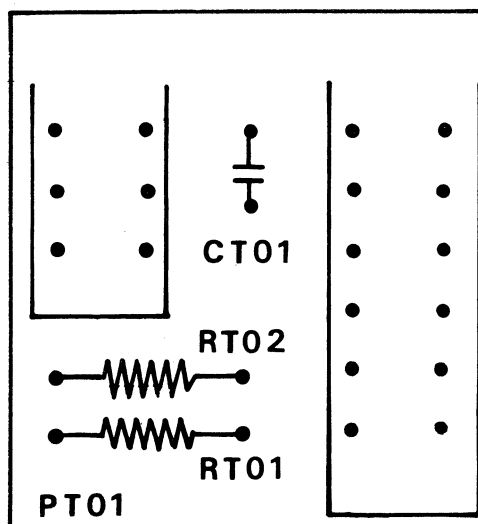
Mono Push Switch Assembly PT01 Component Locations
